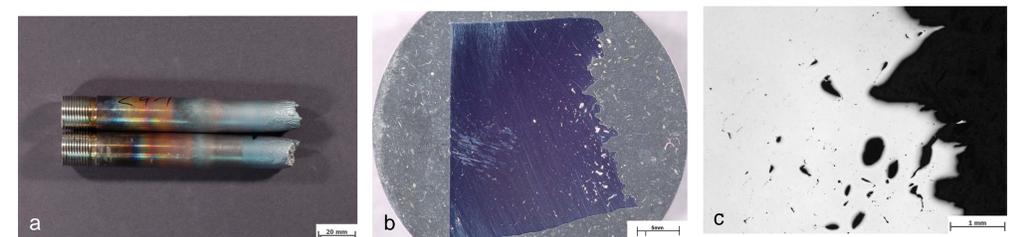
Tensile test at 900°C and crack formation: a) melted and solidified specimens, b) crack formation inside the specimen and c) crack surface detail
